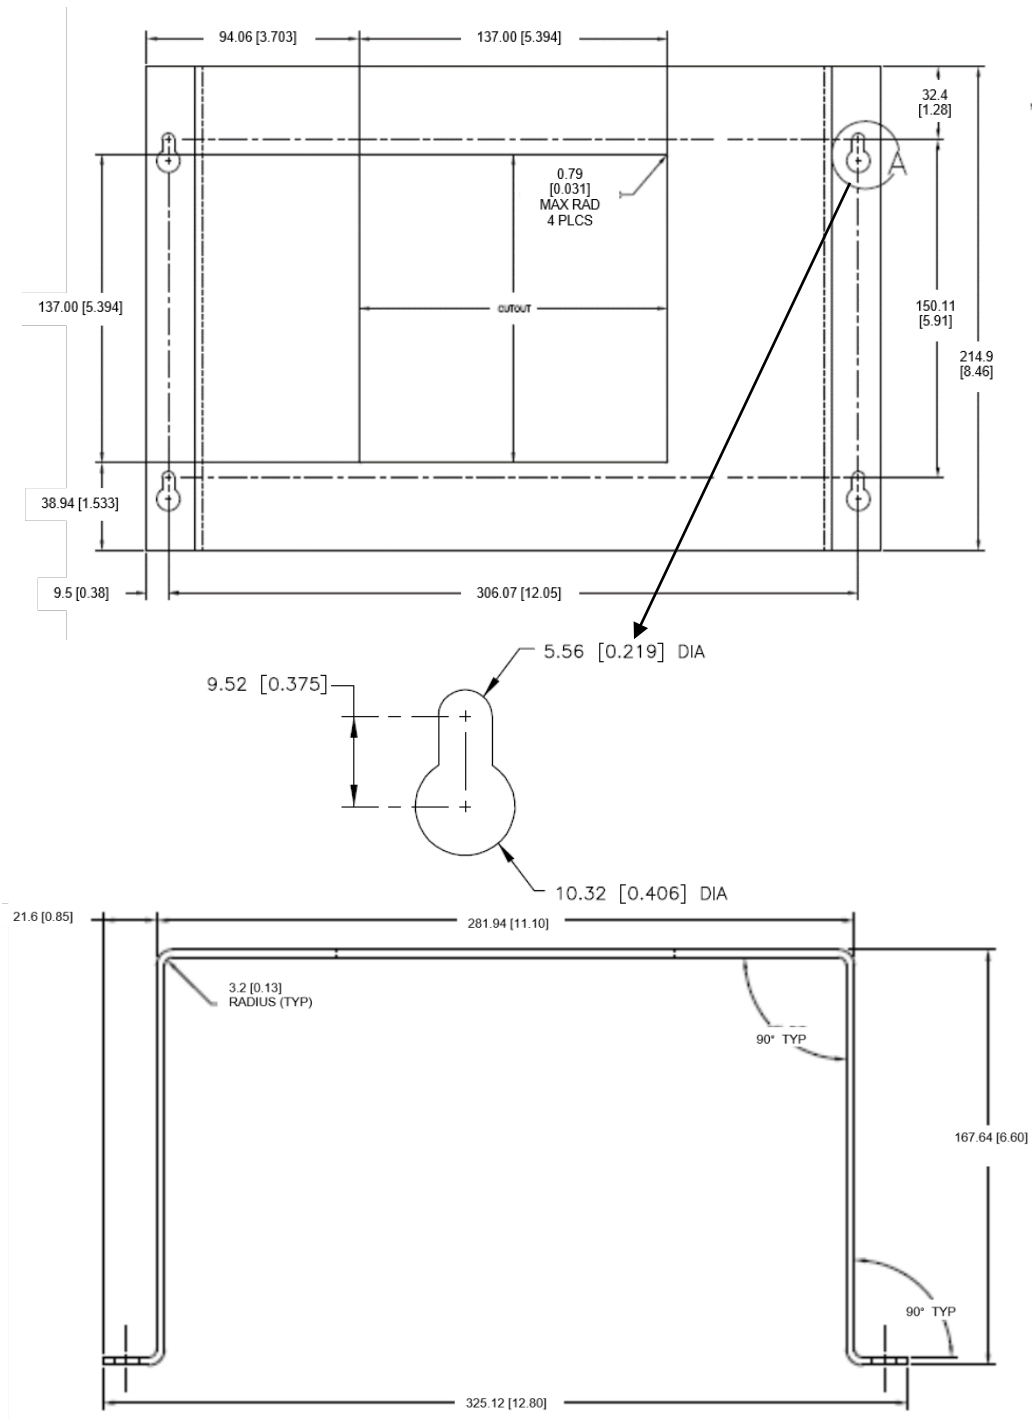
Wall Mount Bracket (Rear and Bottom Views)
